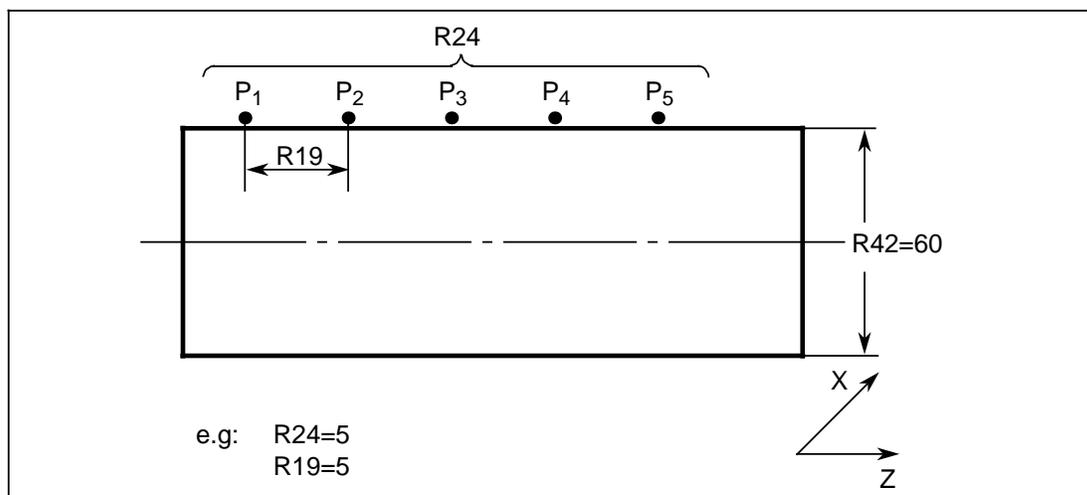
Multi-point measurement on cylinder (outside diameter)
